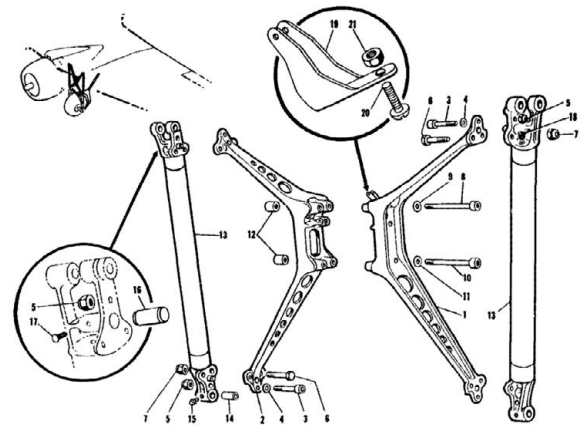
Landing gear assembly of the Dakota C-47 (reproduced from USAF 1956:308).
